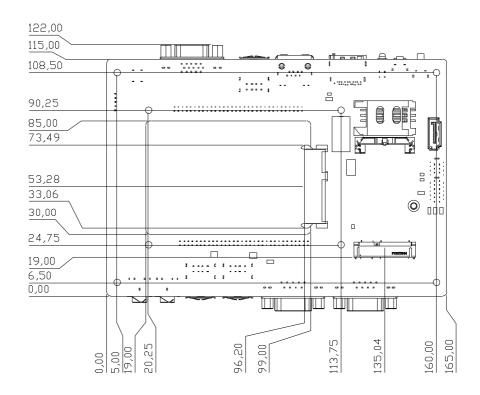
MIOe-DB2000 Mechanical Drawing (Bottom Side)
